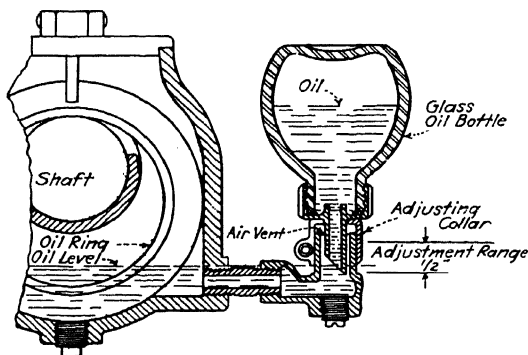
Constant-level oiler mounted on ring-oiled bearing.
